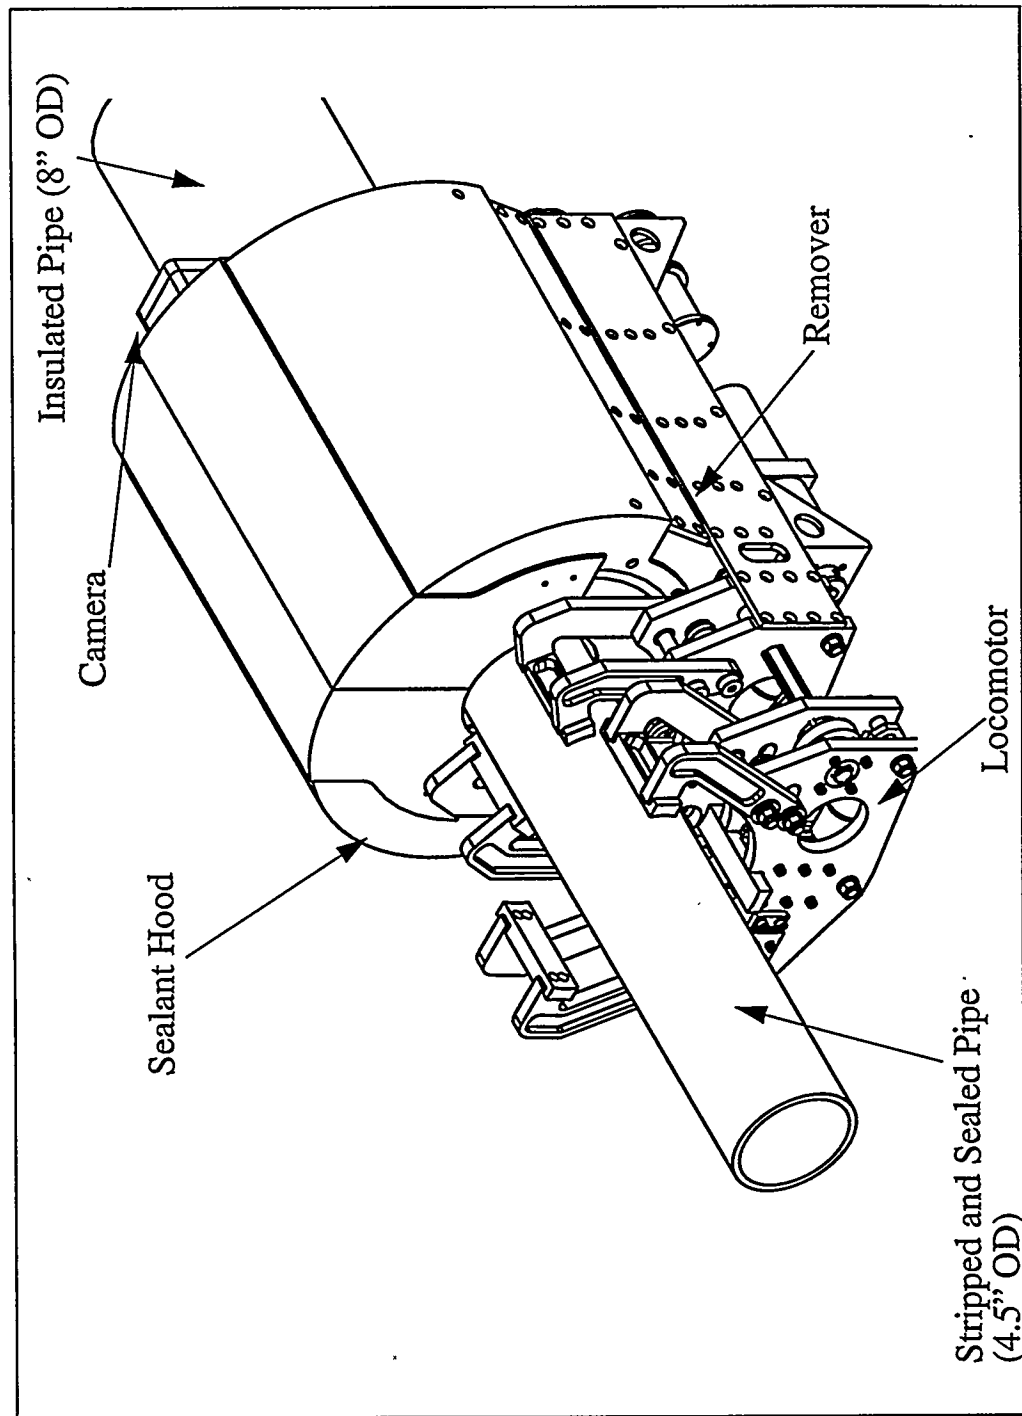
Mechanical configuration of the BOA pipe-crawler
